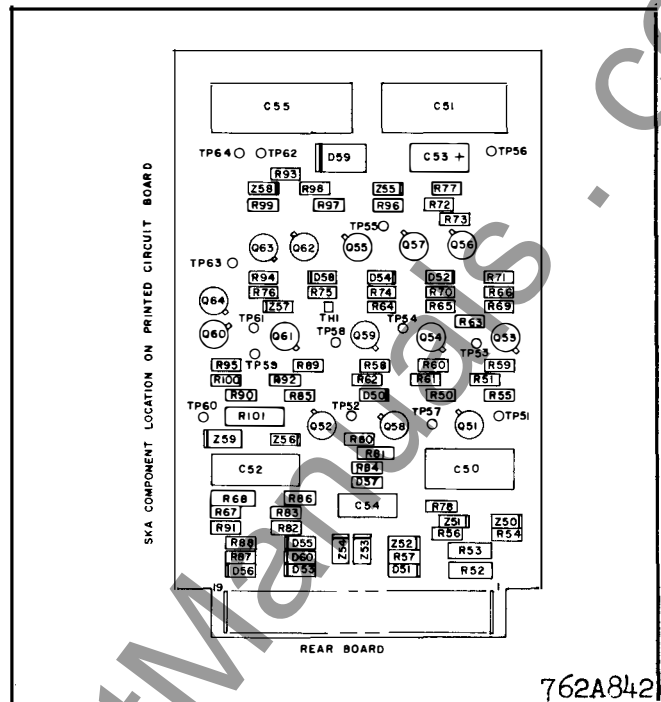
Component Location for the Rear Printed Circuit Board of the Type SKA Relay.
